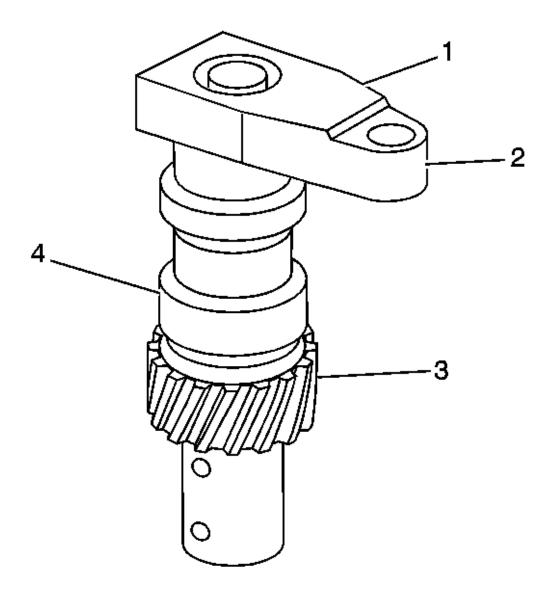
View Of Oil Pump Drive, Bolt Hole, Gear & Body Courtesy of GENERAL MOTORS CORP.
